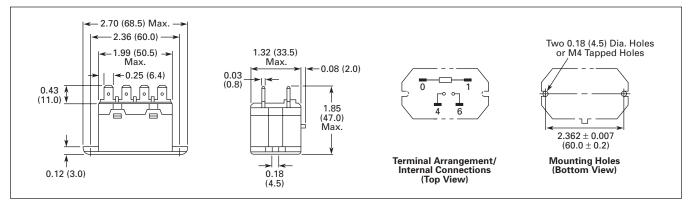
D8PR6TF — Approximate Dimensions in Inches (mm)
